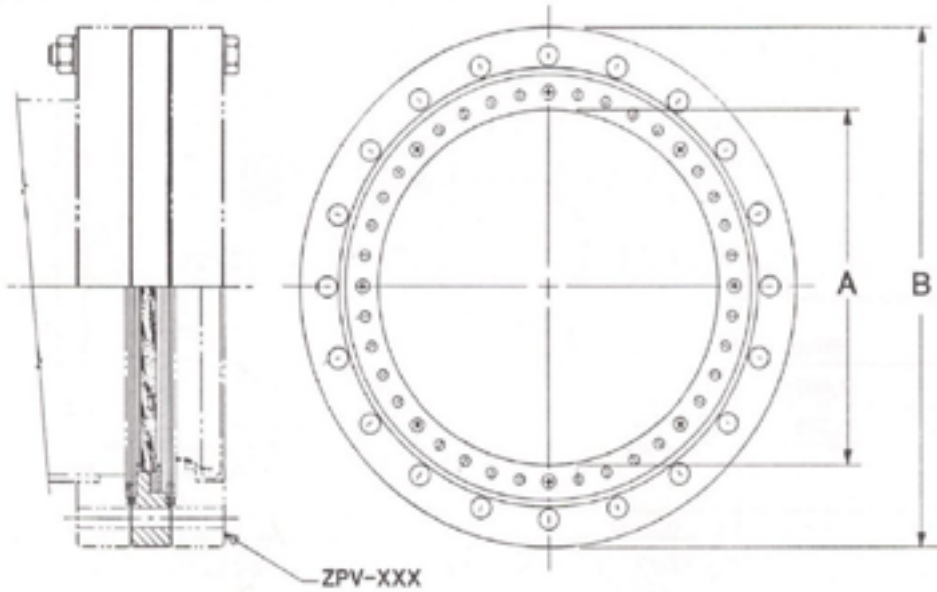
Dimensional drawing of phosphor screen shown with viewport in place.
